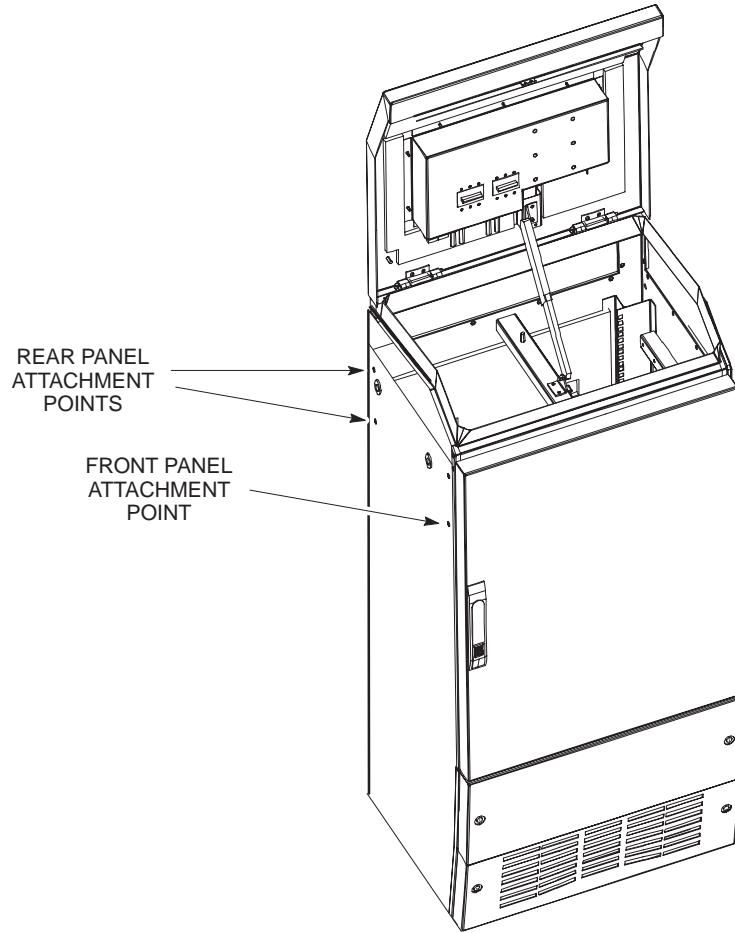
Shroud attachment points on the auxiliary equipment housing
